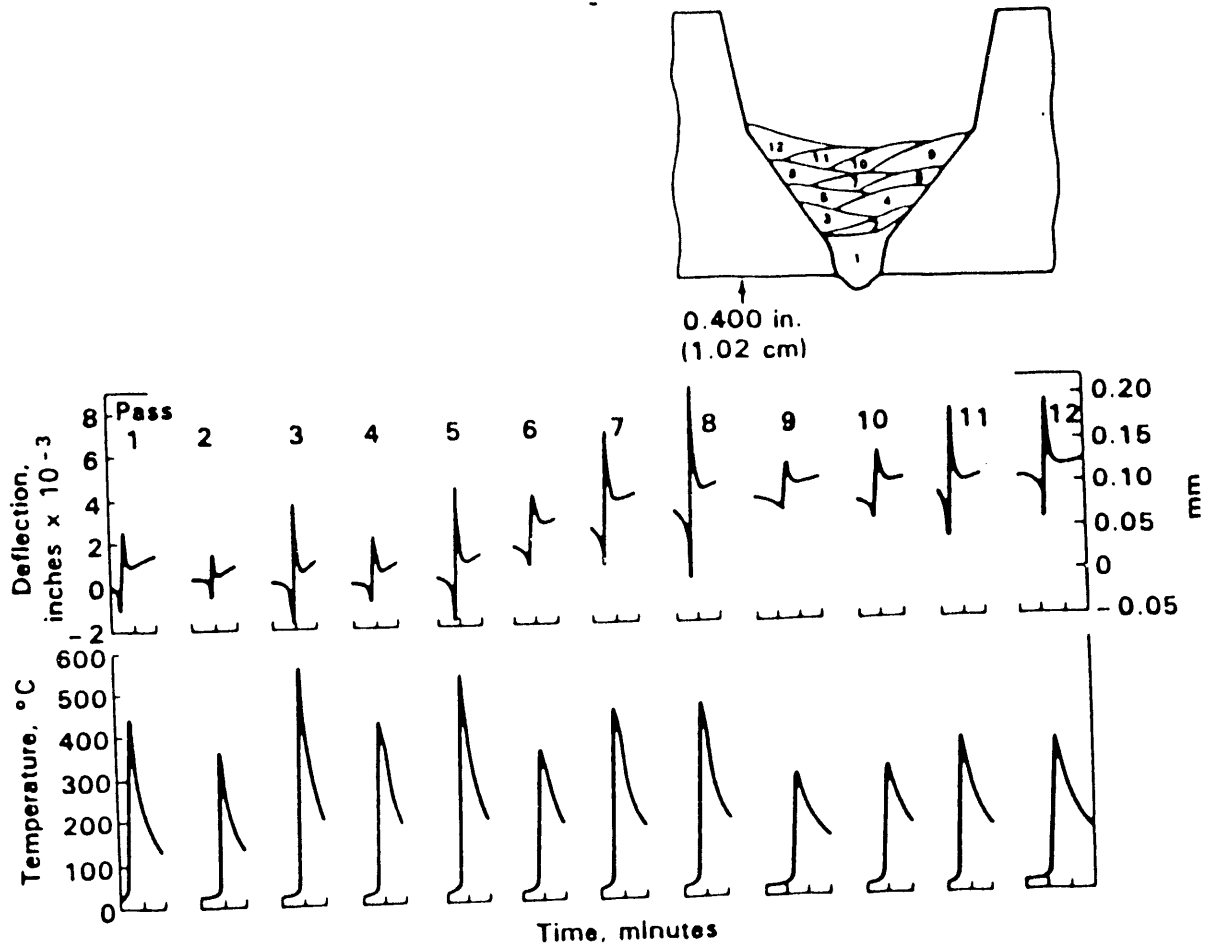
Temperature and Surface Deflection Parallel to the Weld Centerline Surface 10mm from the Weld Centerline for the First Twelve Passes of a 610mm Diameter Pipe Weld
